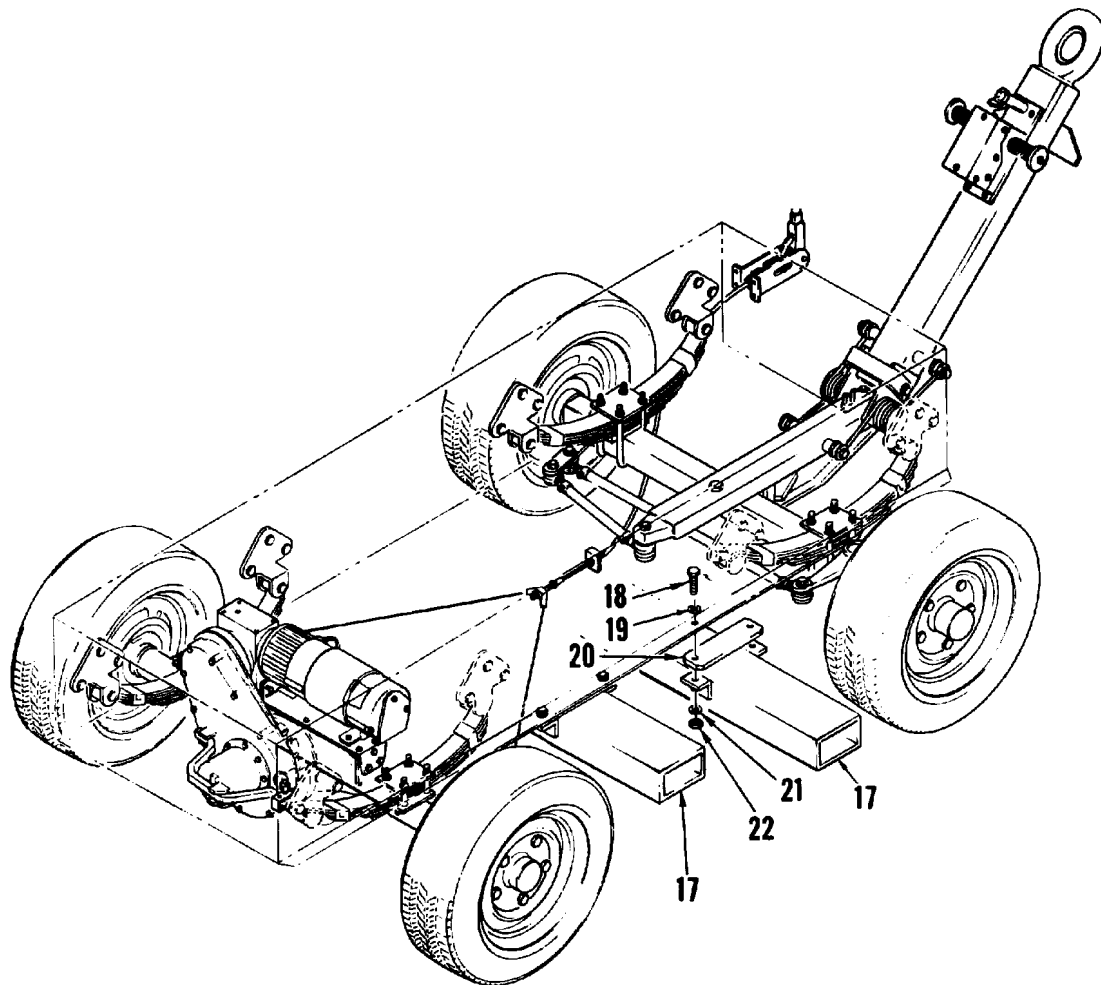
Fuel Tank Removal (Sheet 1 of 2).
